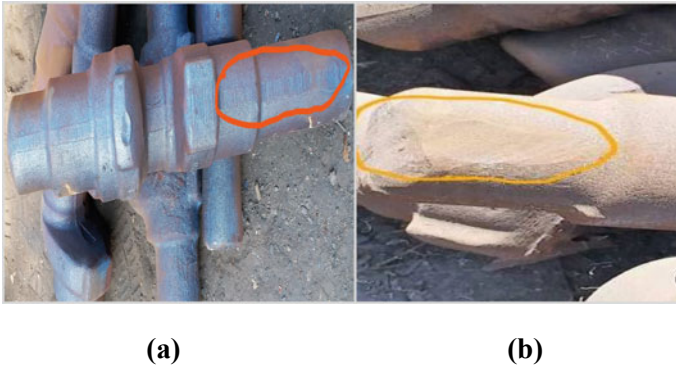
Seam cracks on main bearing area, journal (a) and on crankpin (b)
